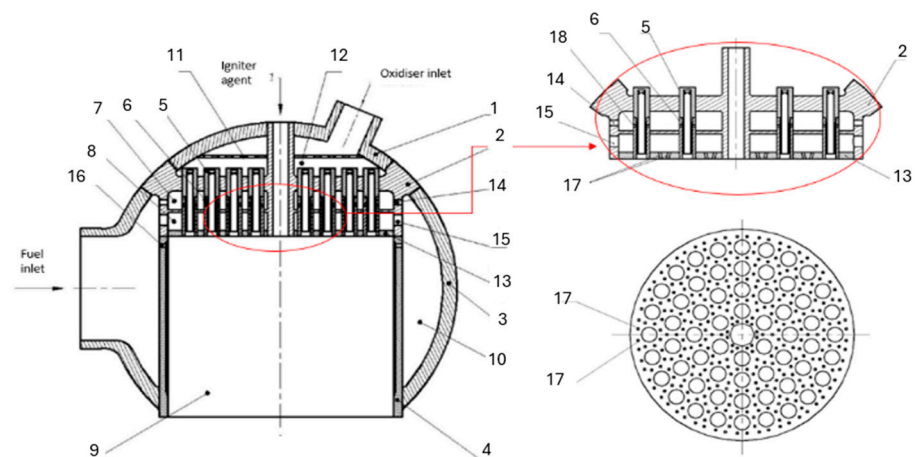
Mixing head design for the pre-burner with an integrated impingement hole. (1)-Top cover; (2)-Secondary bottom; (3)-Fuel collector shell; (4)-Cavity wall; (5)-Oxidiser nozzle; (6)-Fuel injection part; (7)-Primary fuel injection cavity; (8)-Secondary fuel injection cavity; (9)-Combustor; (10)-Fuel collector cavity; (11)-Flow distribution plate; (12)-Oxidiser cavity; (13)-Injection panel; (14)-Fuel primary inlet; (15)-Fuel secondary inlet; (16)-Plurality of fuel tertiary inlets; (17)-Fuel secondary spraying holes; (18)-Reproduced from CN Patent No. 119288703A in Ref. [201].
